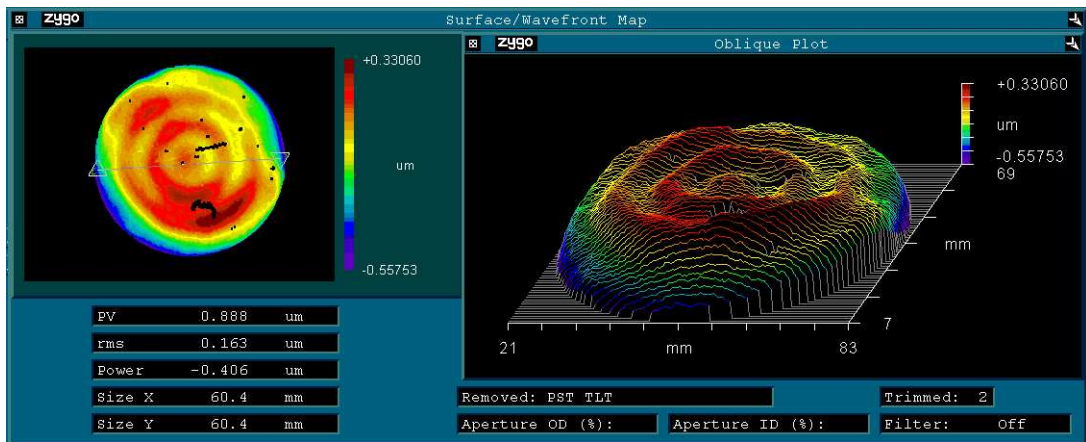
Flatness of Bottom Air Bearing Porous Surface
